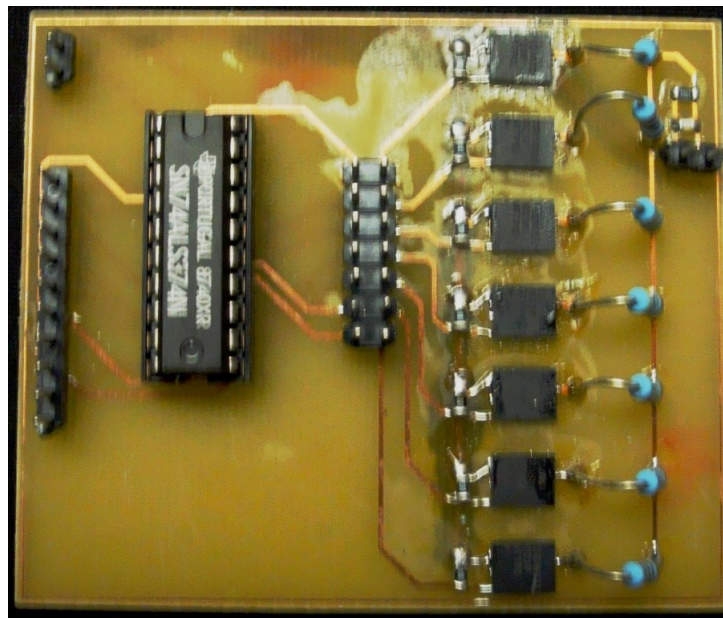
The complete assembled circuit of the smart VRM with the PCB drawing.
